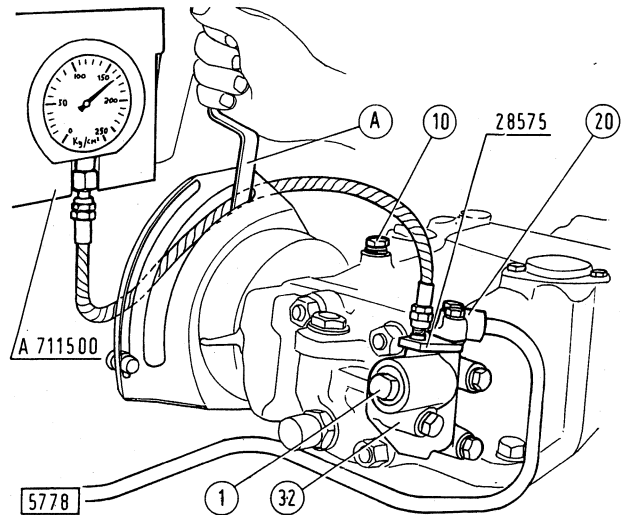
Checking the maximum-working pressure of the hydraulic circuit (pressure relief valve setting).
